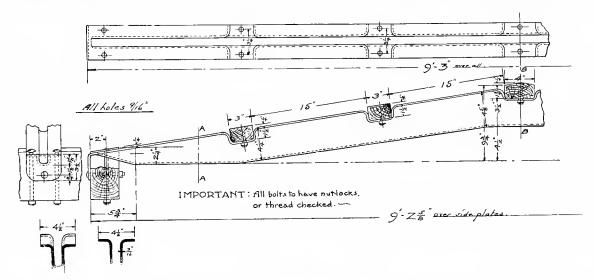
Cleveland Type B Pressed Steel Carline, Heavy Pattern with Diminishing Ends. Cleveland Car Specialty Company.
